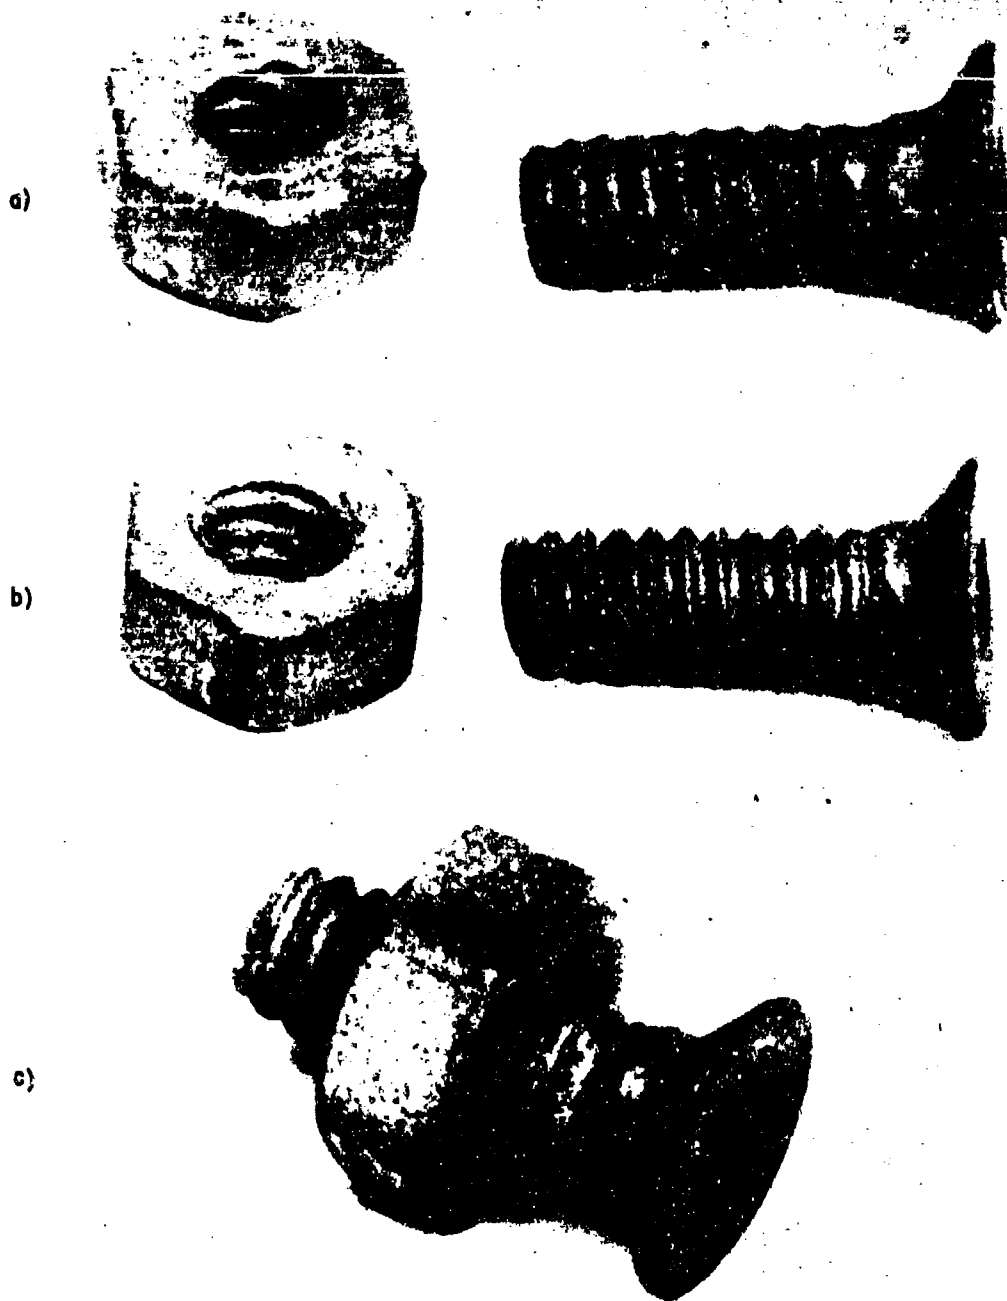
Cb752 - 10-24 Nut and Bolt Coated With Si-20Cr-20Fe Fused Silicide. (a) Brush Coated With Slurry, (b) After Fusion (c) Nut and Bolt assembled. All Photographs Approximately 6X.
